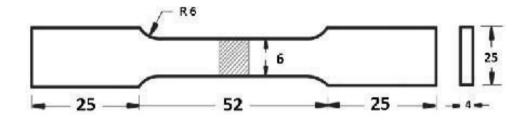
Dimension of the tensile test specimen based on ASTM B557M.
